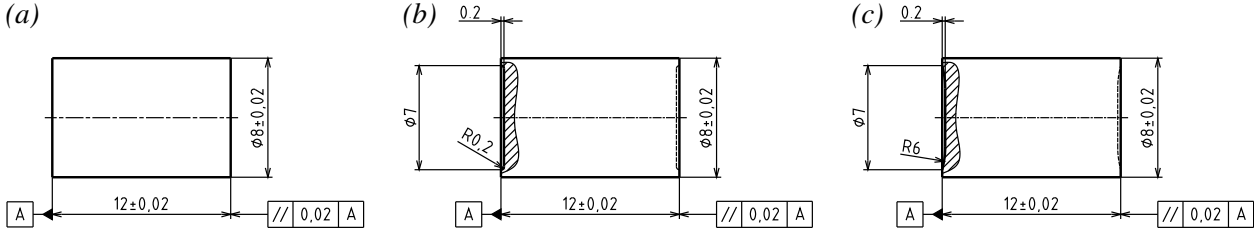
Detailed drawing of: (a) smooth cylindrical specimen; (b) Rastegaev-type specimen – not used further because of the unwanted edge collapse; (c) Rastegaev-type specimen – used for the further study.
